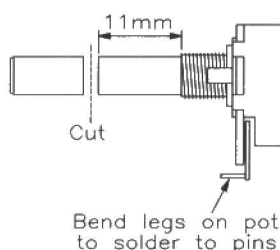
Modifying the miniature potentiometers for PCB mounting.
